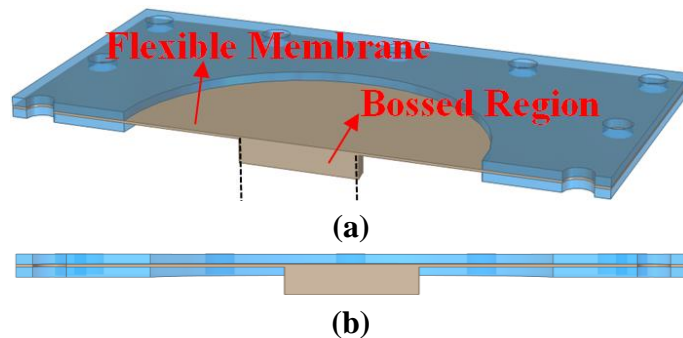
(a) Sectional view and (b) Front view of the bossed diaphragm
